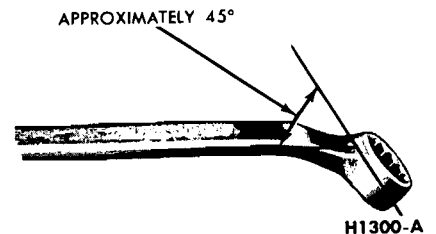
Wrench for Bleeding Brake Hydraulic System
